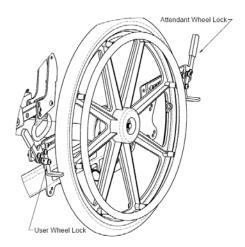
User Wheel Locks and Attendant Wheel Locks
